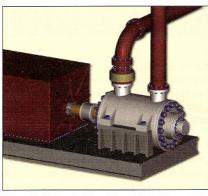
Steam-turbine-driven, barrel-type, main boiler feed pump.
